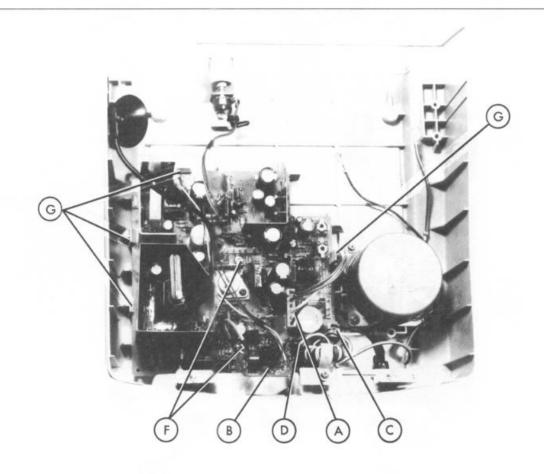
MONITOR CIRCUIT BOARD REMOVAL/REPLACEMENT
